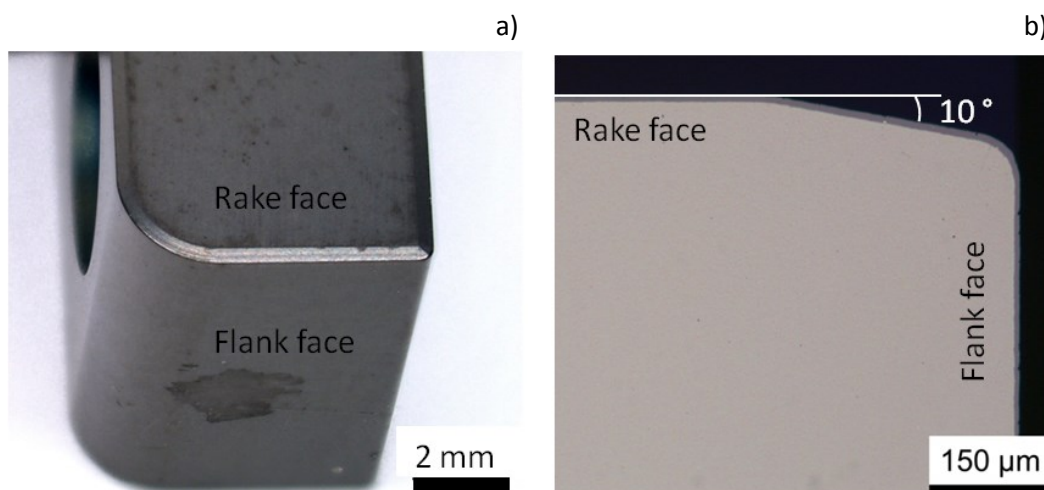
a) Schematic illustration of the milling insert, b) LOM image of the cross section of the chamfered cutting edge.
